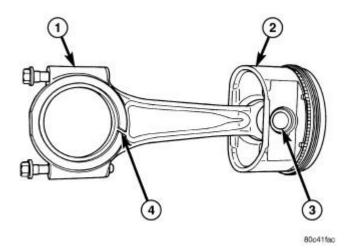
PISTON AND ROD ASSEMBLY Courtesy of CHRYSLER LLC
